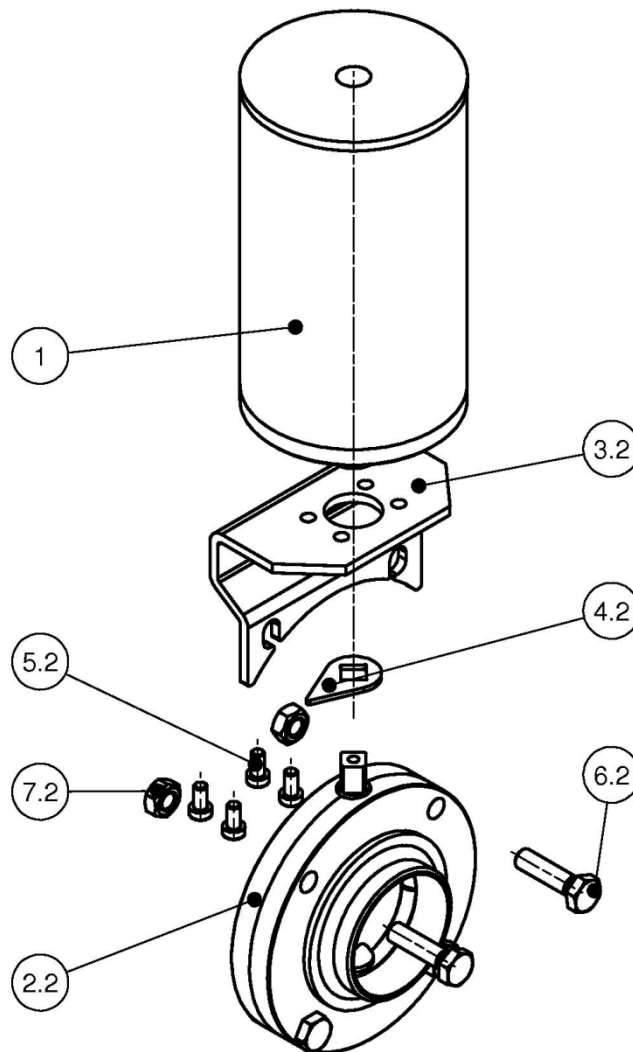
Pneumatic actuator PAMS with butterfly valve type Classic
